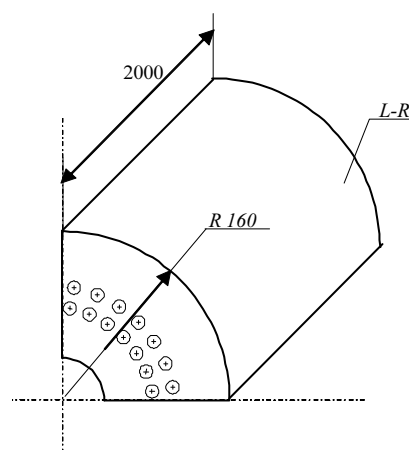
Scheme for cutting cylindrical specimens from a CCM roller
